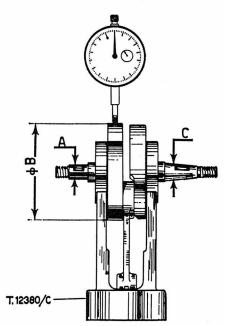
Crankshaft and connecting rod assembly is mounted in special fixture to check eccentricity.
